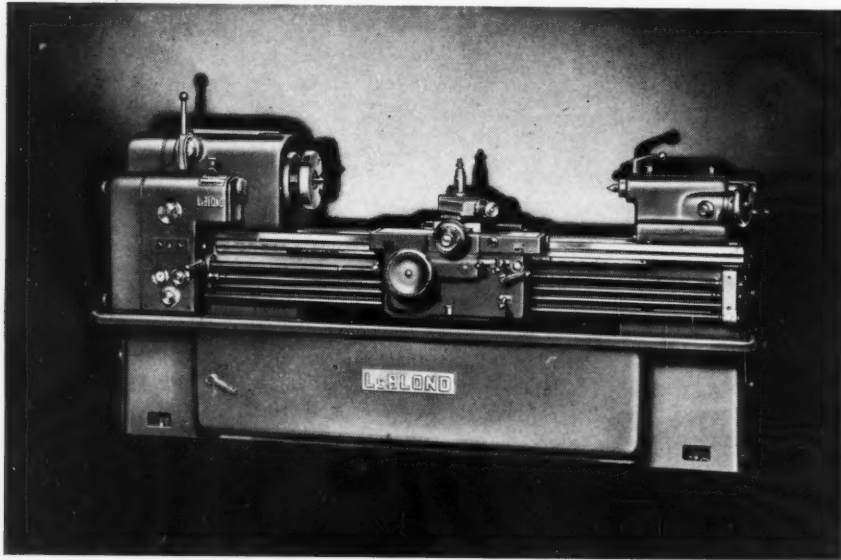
(Left) LeBlond 16-inch Lathe with a Single Control Lever on the Headstock
